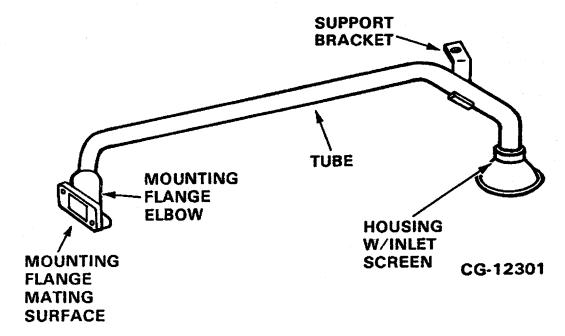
Oil Pump Pickup Tube Leak Check Areas
